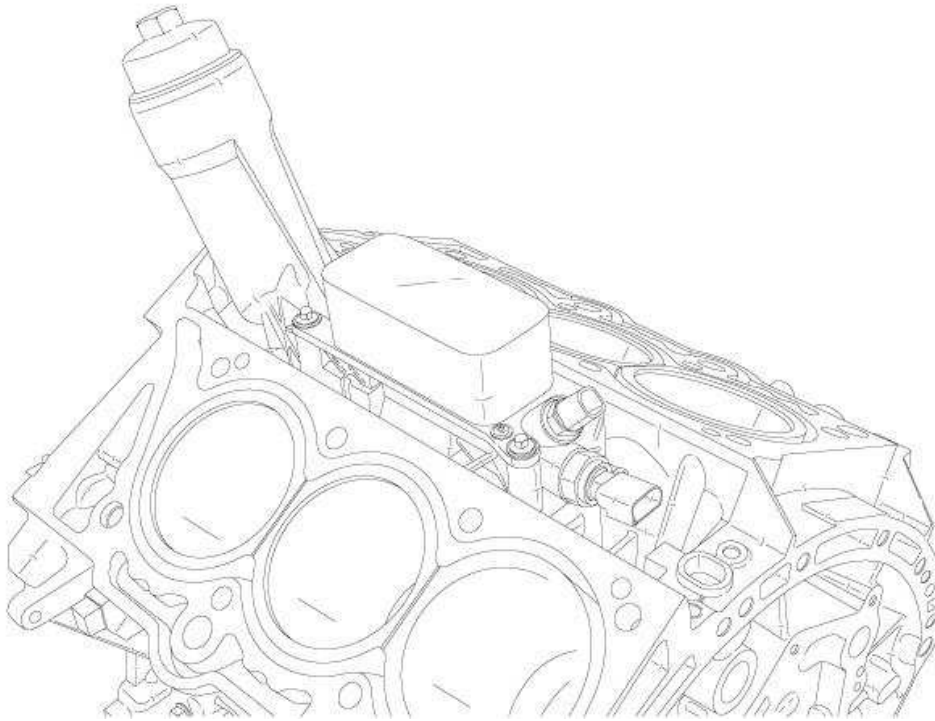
Oil Filter Cap, O-Ring Seal & Oil Filter
